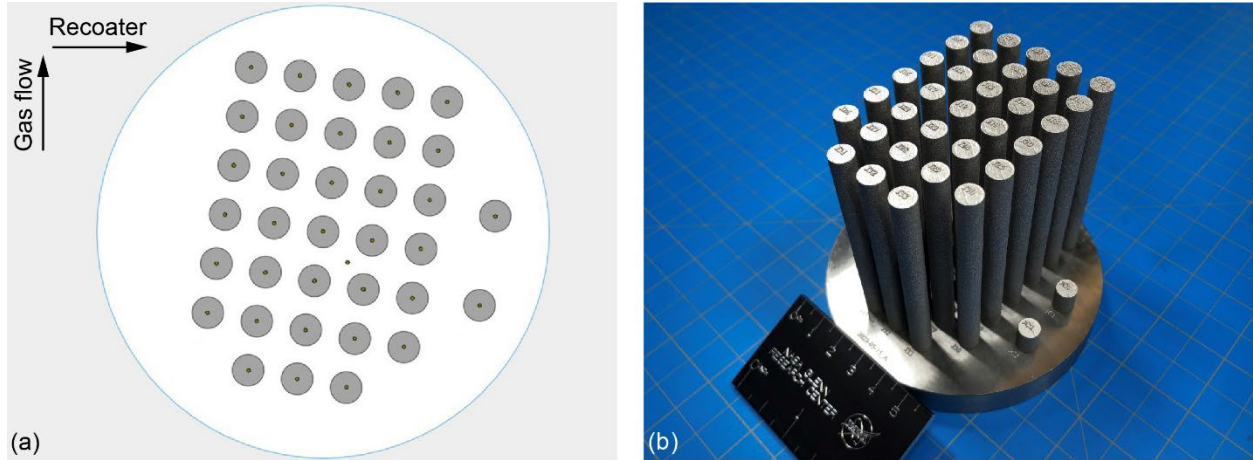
(a) Layout of specimens on build plate and (b) as-fabricated or as-built specimens.
